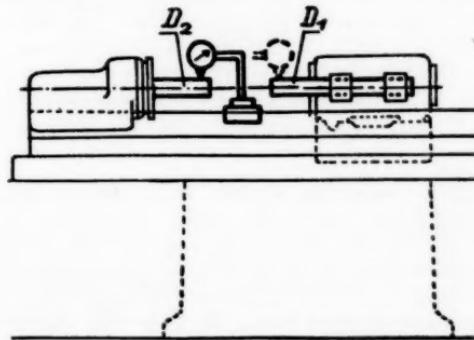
Checking height of main spindle and internal grinding spindle.
